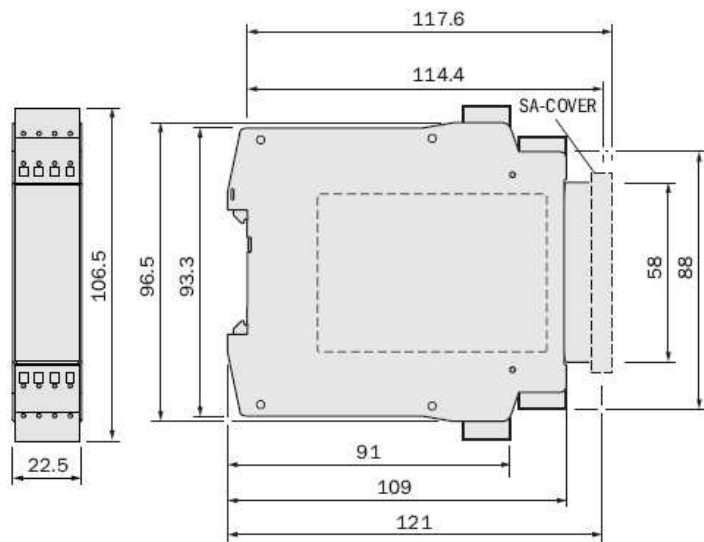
Dimensional drawing (mm), variant with spring terminals
